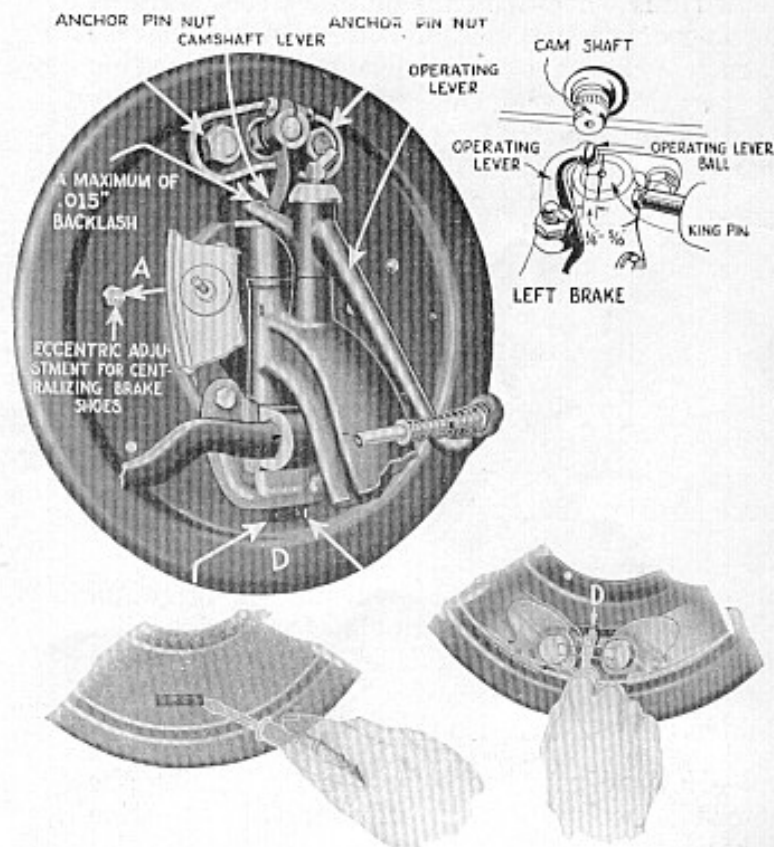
Left front brake showing all points of adjustment. Sketched view at the right of "A" shows the wheel side of the eccentric adjustment. Note correct front cam lever position in upper right corner, and clearance adjustment at "D"
